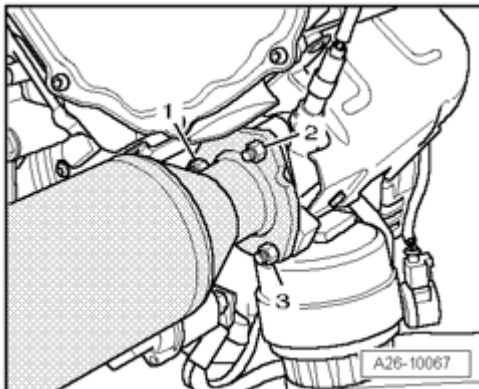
Removing Nuts & Right Front Exhaust Pipe With Catalytic Converter
